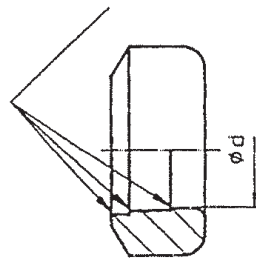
Locking ring for PE hose with 3 clamping points
